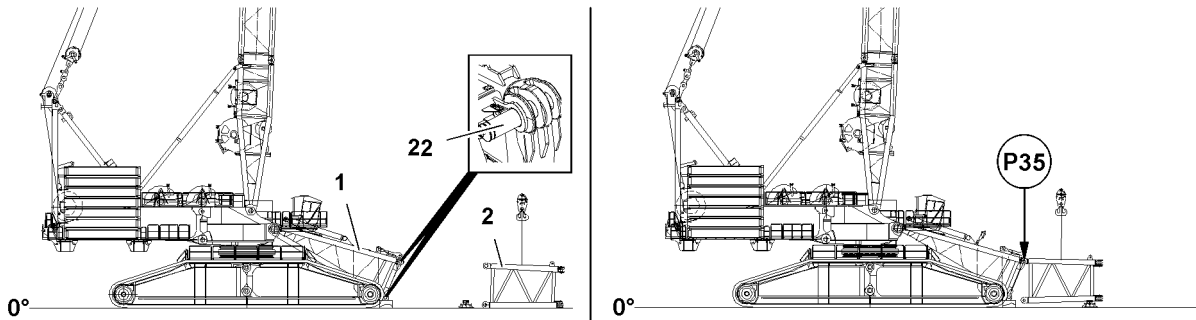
Assembling the lower P-adapter on the S-pivot section - Positioning
